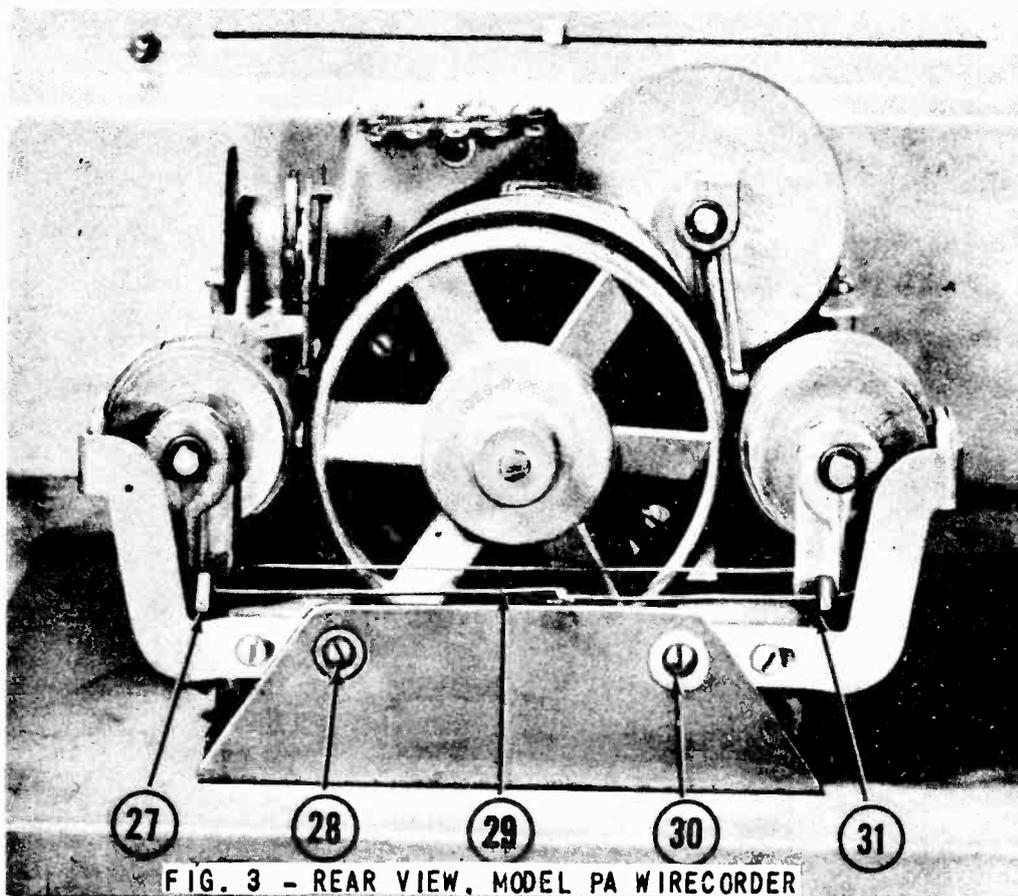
REAR VIEW, MODEL PA WIRECORDER
